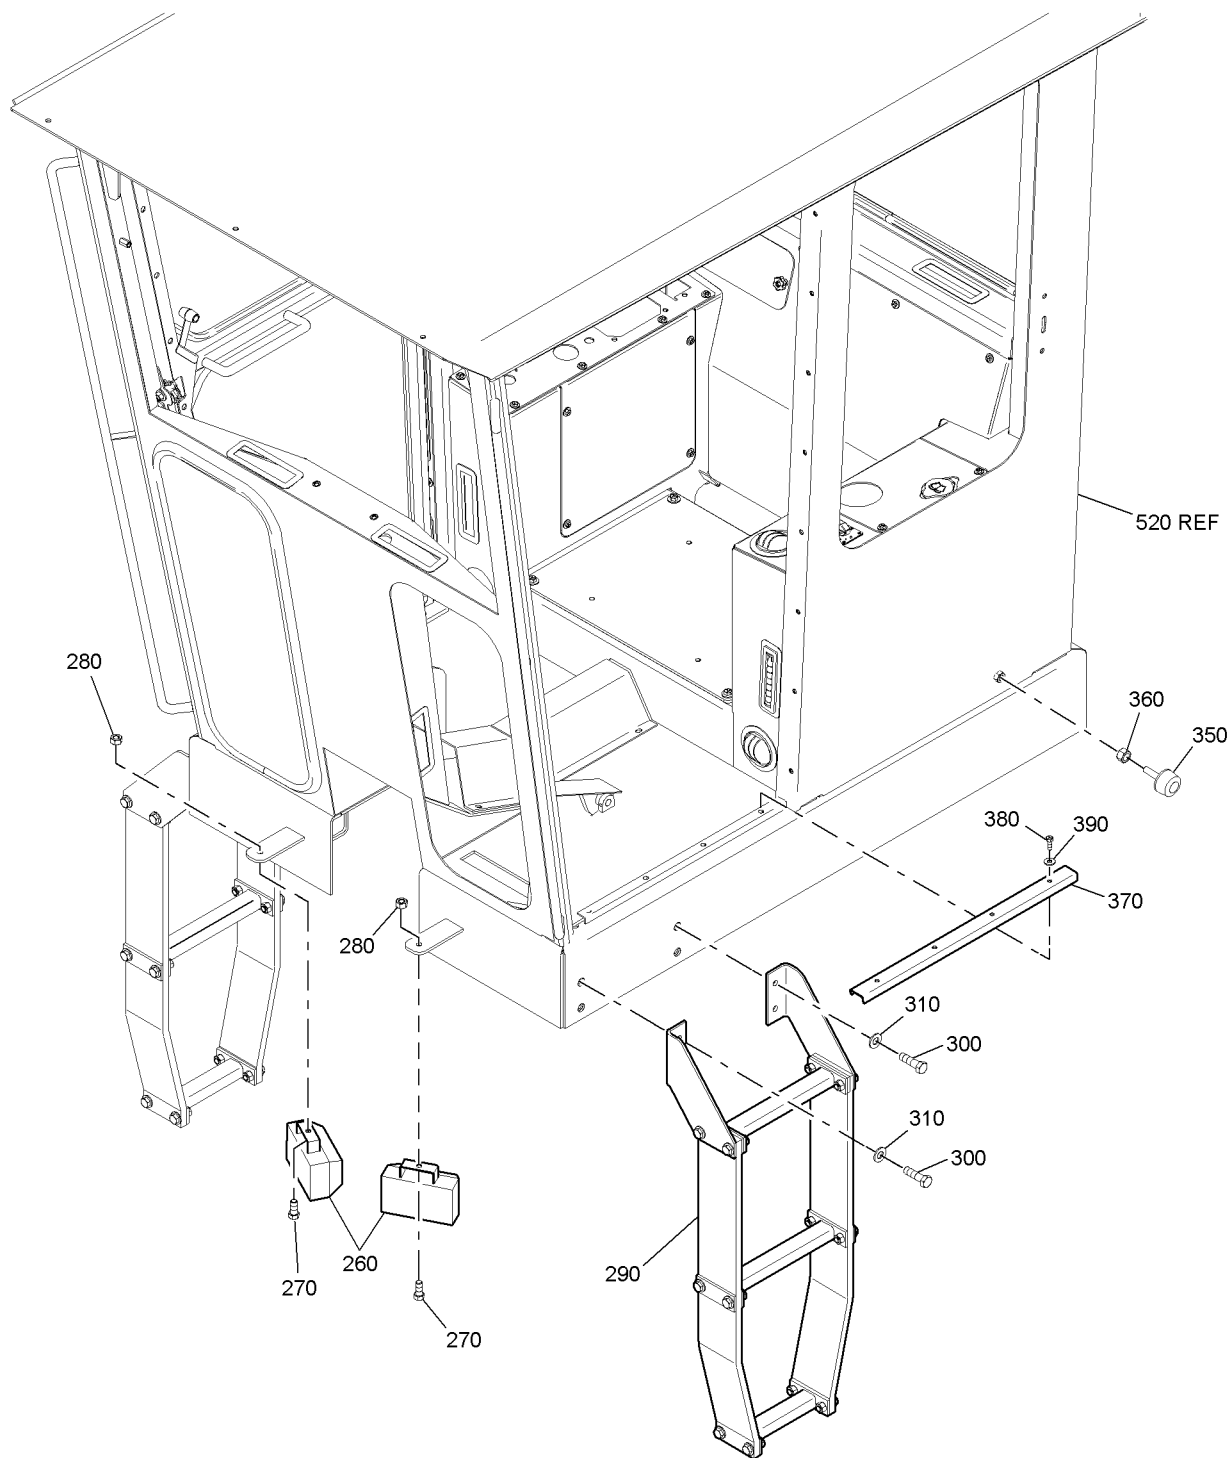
CAB ASSEMBLY (LEFT SIDE VIEW) (SHEET 3 OF 4)
